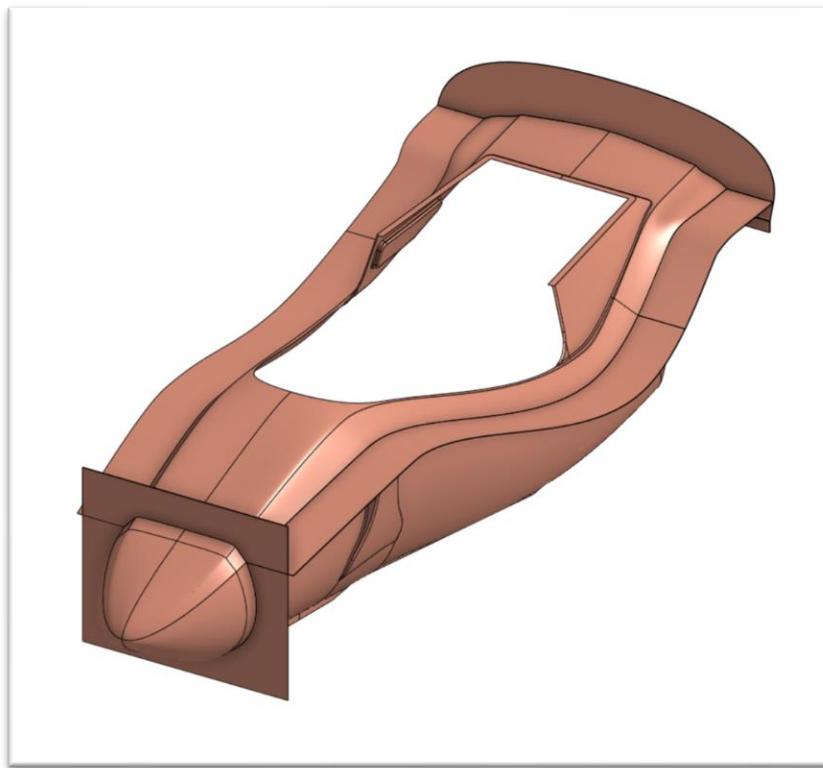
Onshape model of plug surfaces with mockup of flanges
